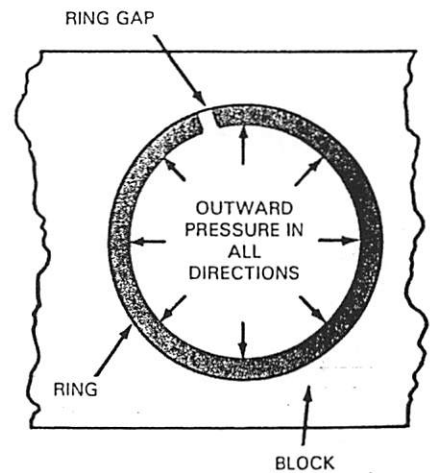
Top view of cylinder shows sealing action of piston ring.
